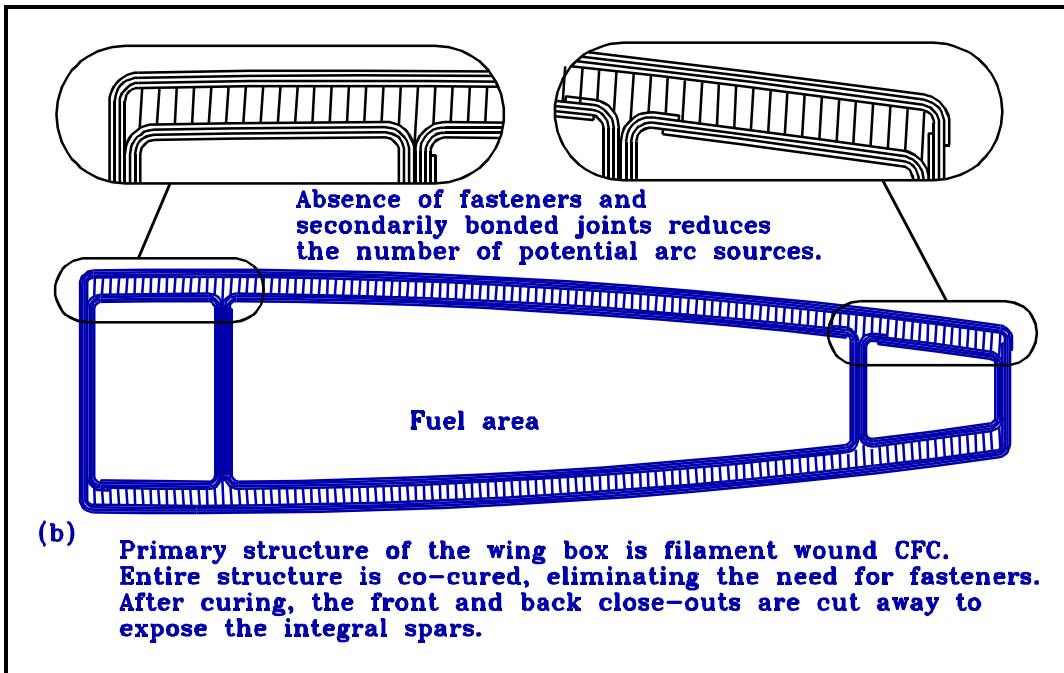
(b): Advanced manufacturing used to eliminate fasteners
